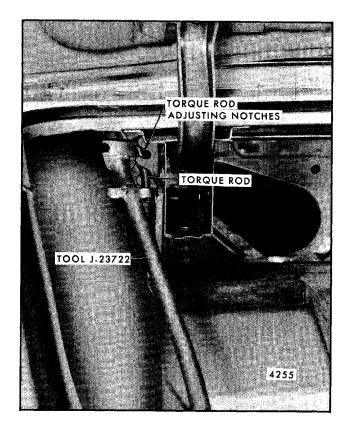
Rear Compartment Torque Rod Adjustment - Cadillac E
